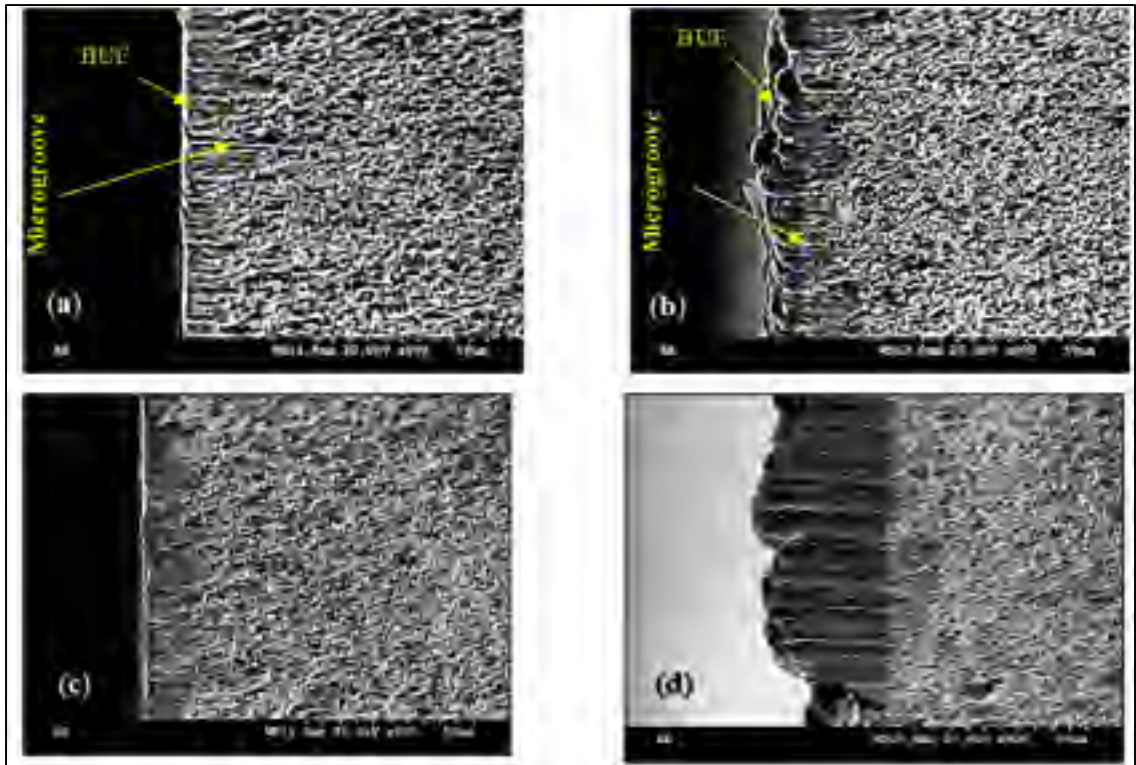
Flank face of the cutting tool after machining at (a) Trail #1, (b) Trial #2, (c) Trial #3, and (d) Trial #4
